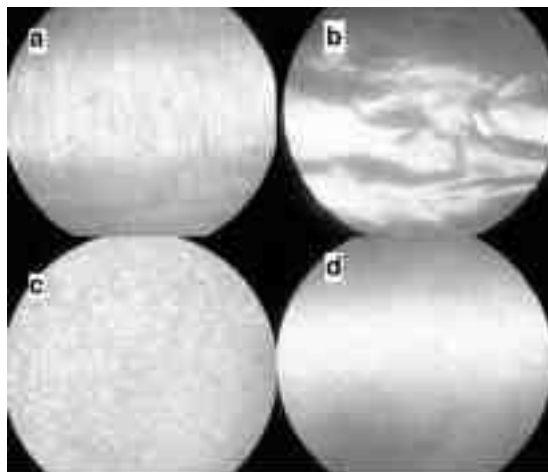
Titanium wire surface appearance: (a) before surface finishing; (b) after using DC-ECM process; (c & d) after using electrically mediated finishing process.
